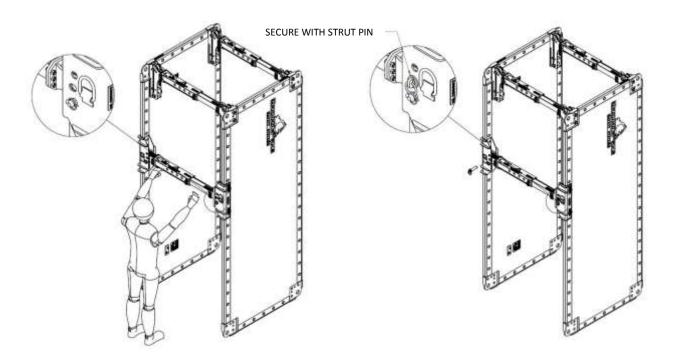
Assembly Step Ten-Install and Secure Bottom Strut Tube
